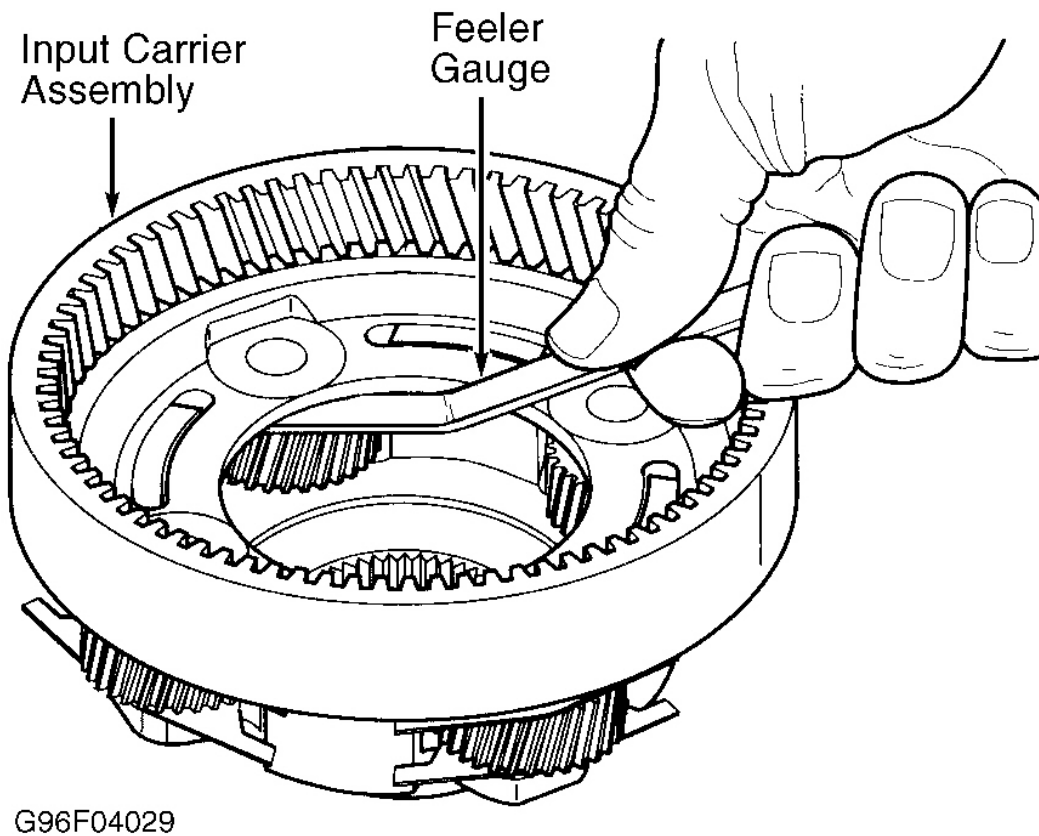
Measuring Pinion Gear Clearance (Input Carrier Shown; Reaction Carrier Is Similar)
